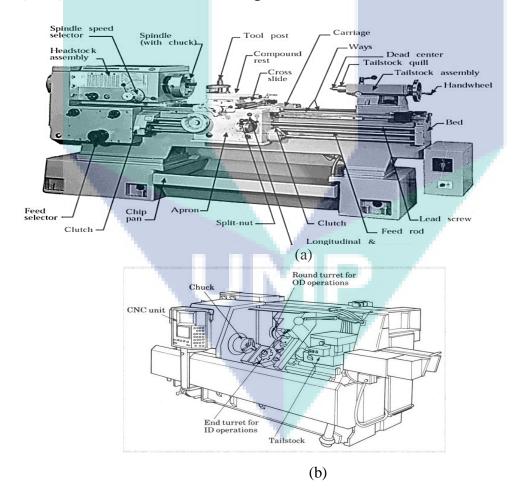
Types of Lathe machine; (a) Conventional (b) CNC Turning Machine. Source: Kalpakjian and Schmid (2014).
